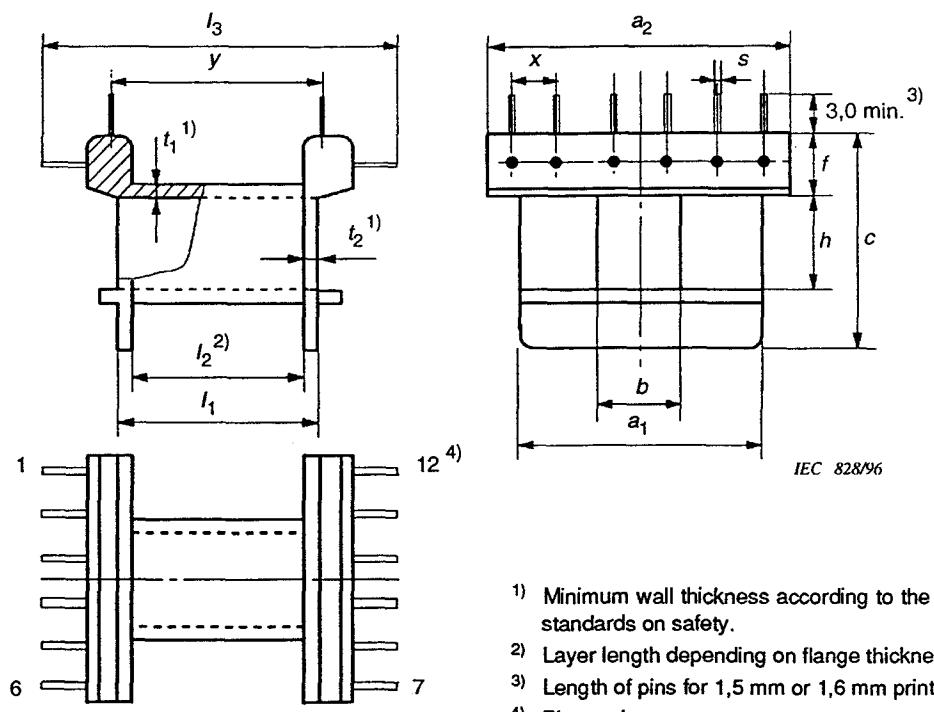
YEx 2 coil formers for printed wiring board mounting, level mounting style
